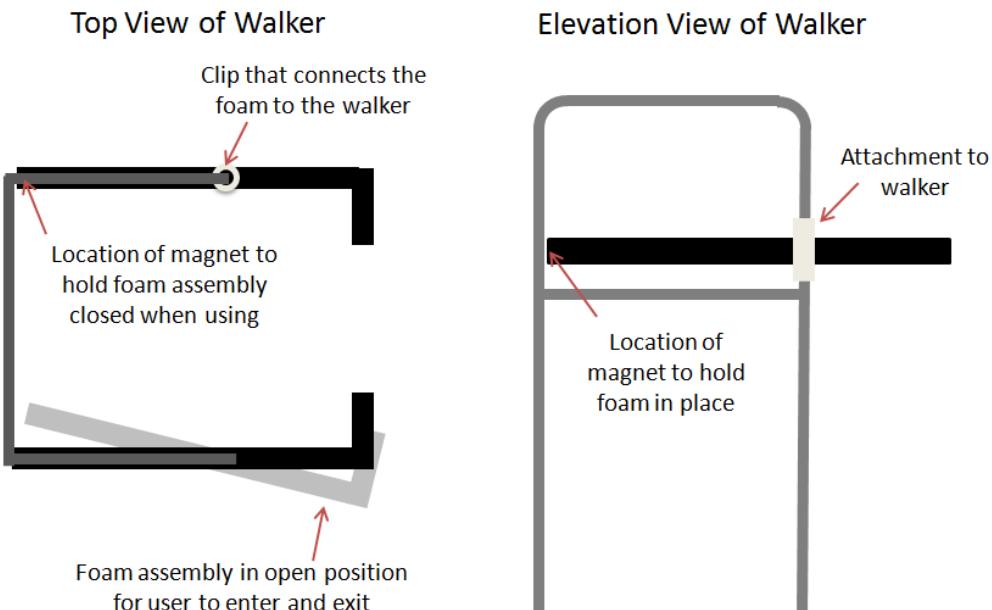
Top and Elevation Views of Walker and Foam (Note: the front of the walker is to the left in both pictures)
